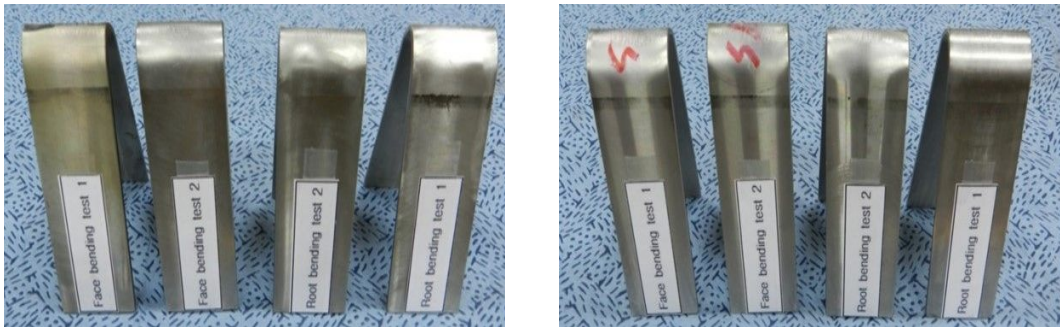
High Mn steel and STS304L specimen after bending test (3mm)
